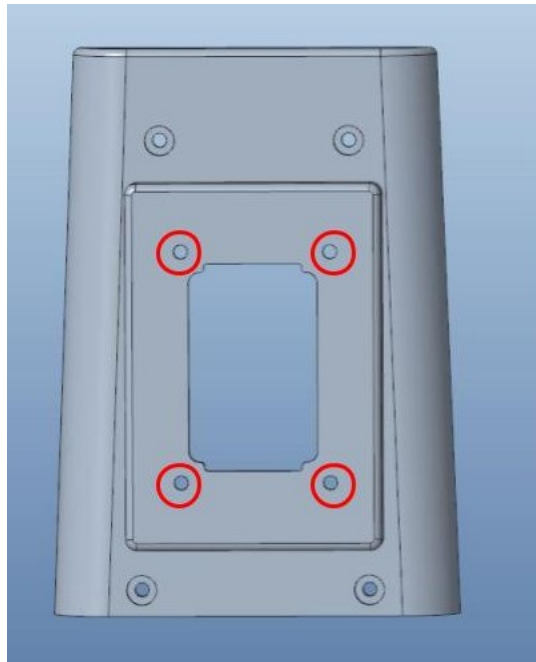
Screw holes on the mounting part where the wall mount will be fastened.
